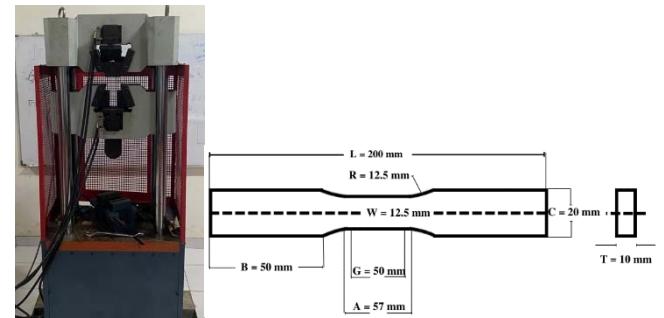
Dimensions of tensile test specimen based on ASTM D557.
